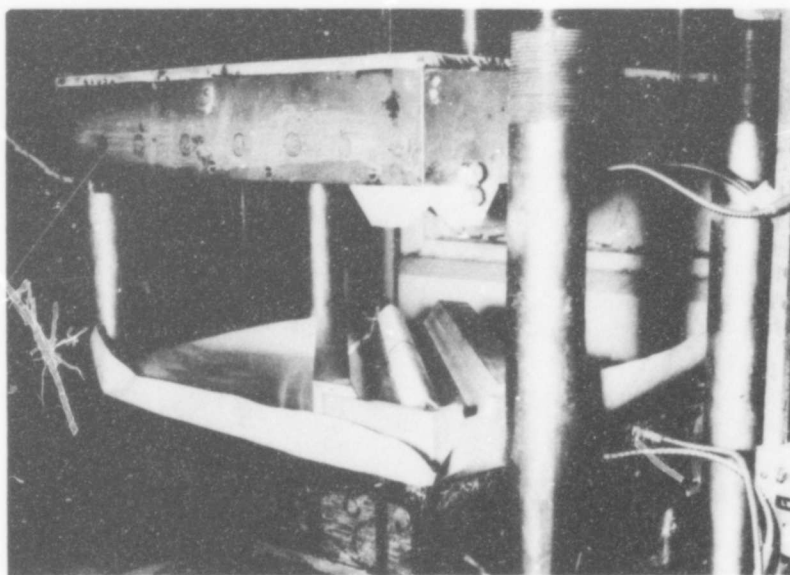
Aluminum Matched Metal Molds Used To Fabricate Tubular Elements.
